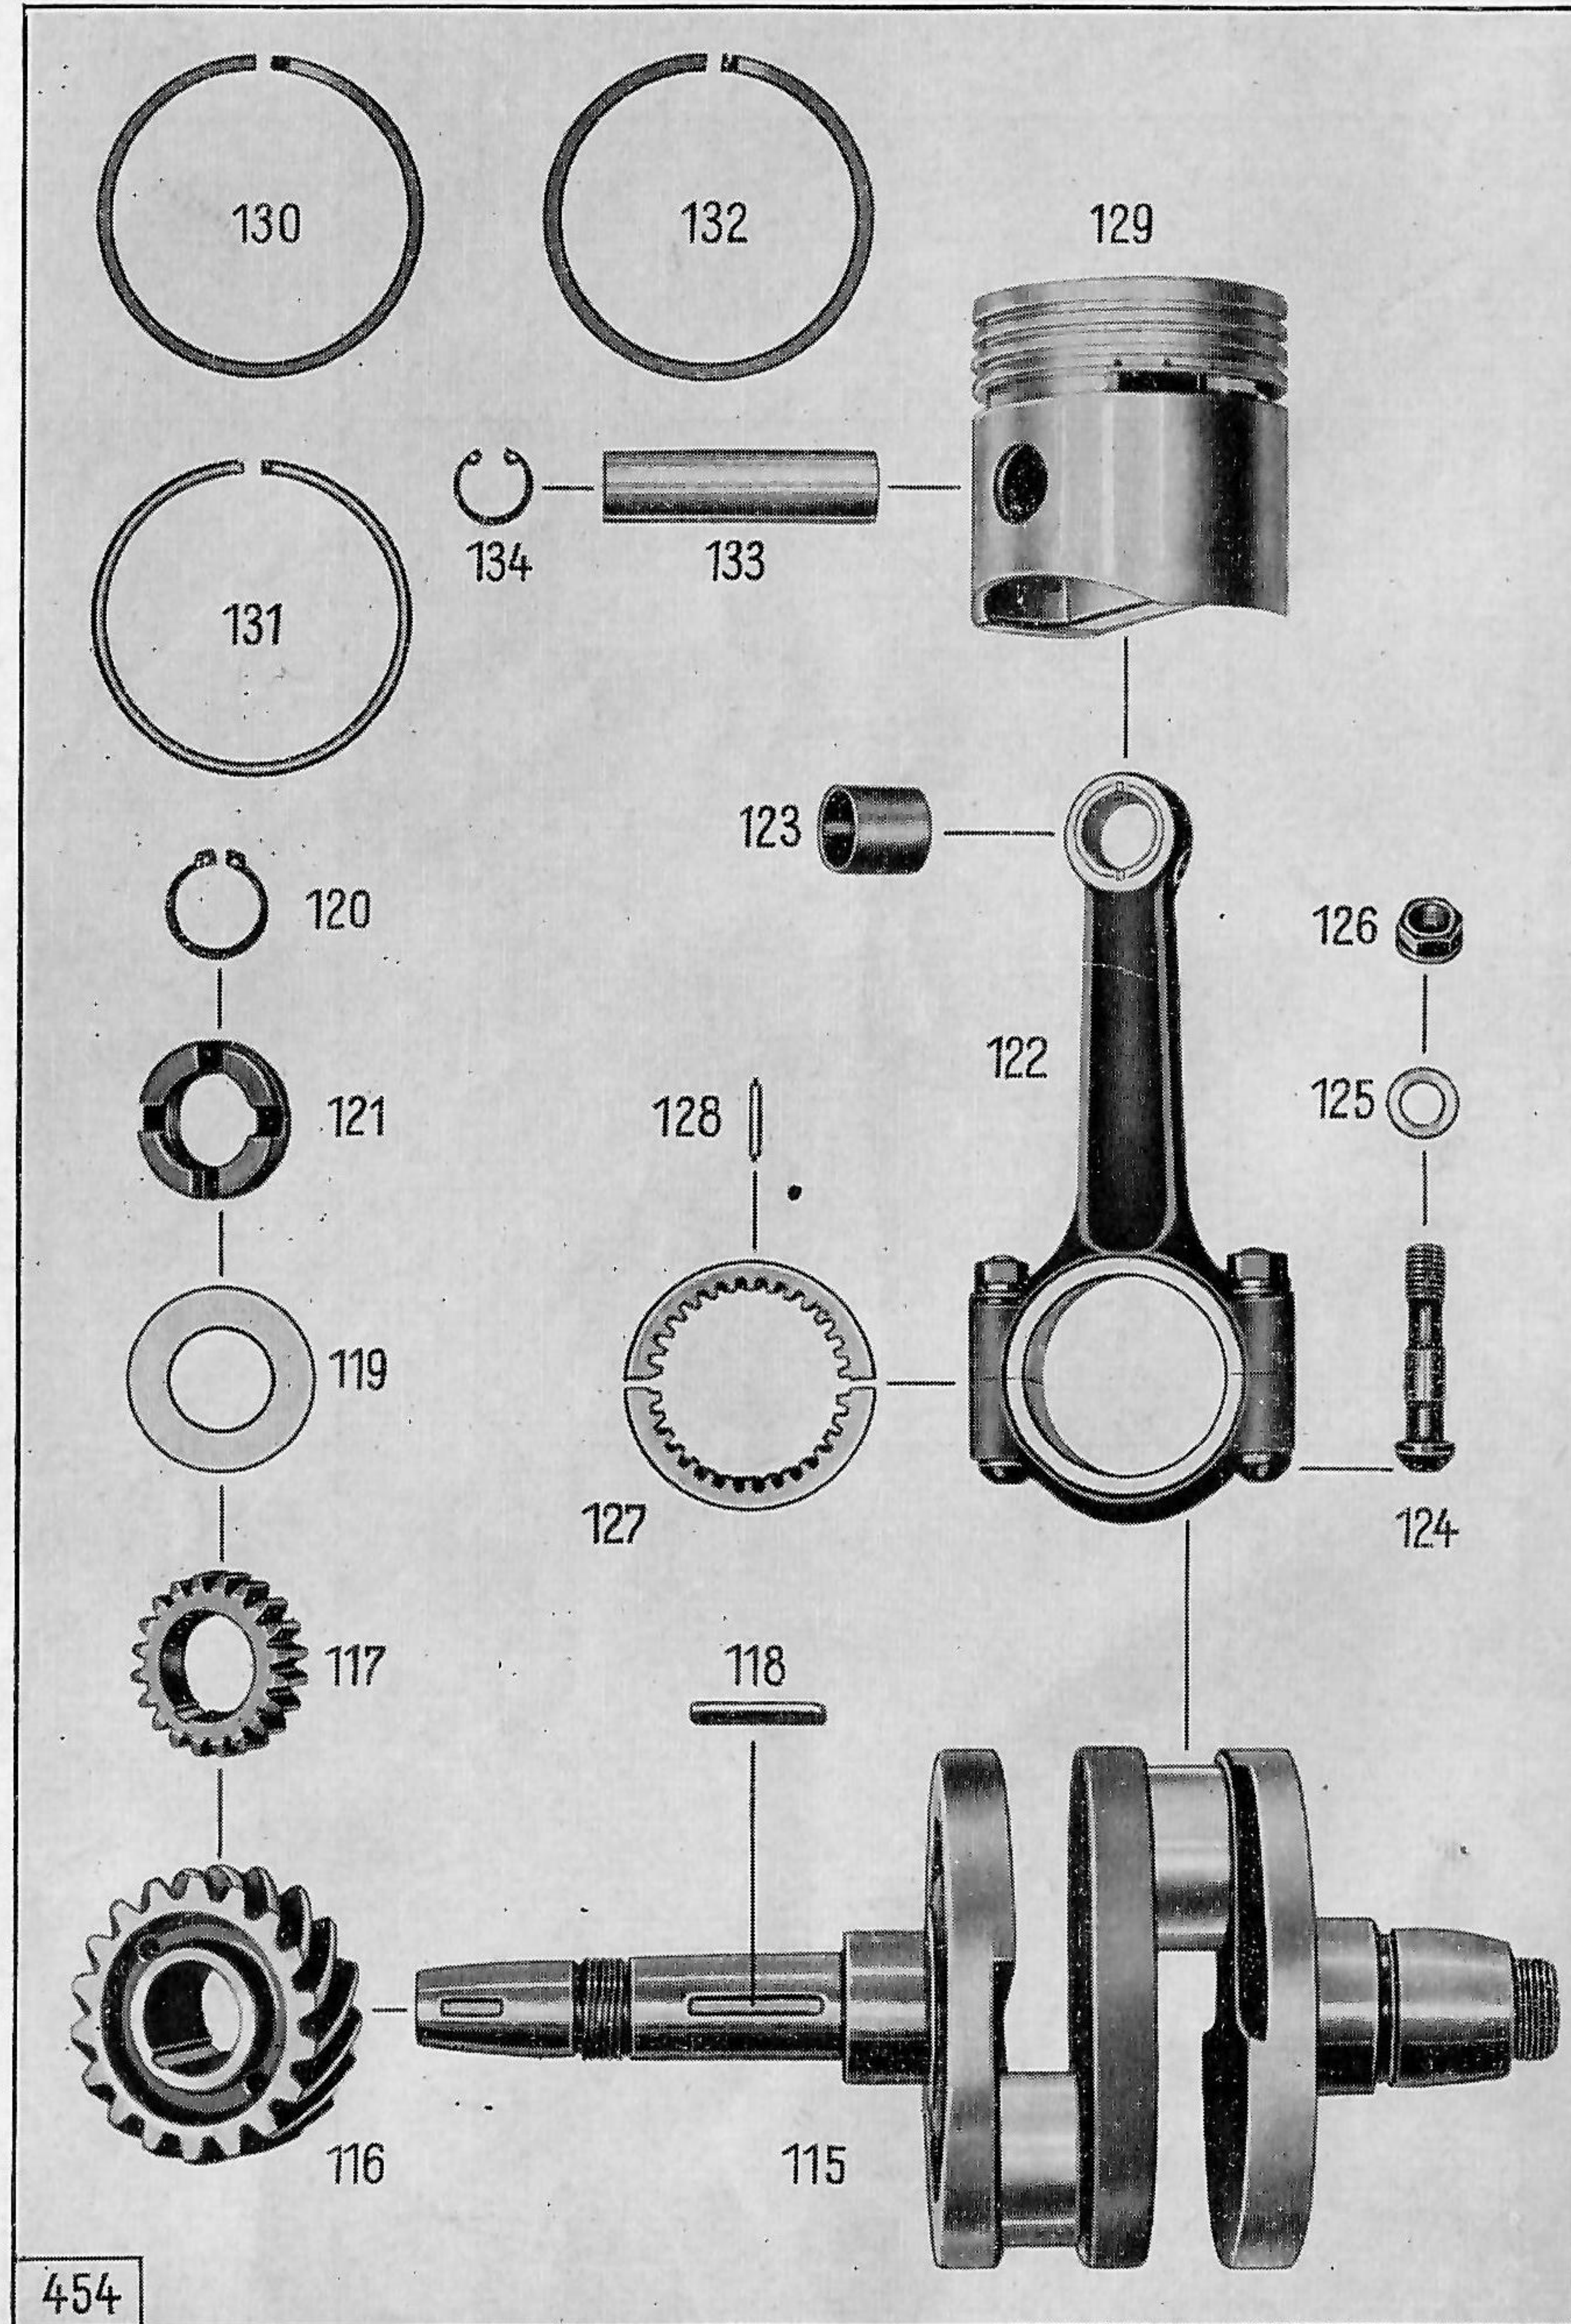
, Group M: c) Drive Mechanism, Crankshaft, Connecting Rods, and Pistons
